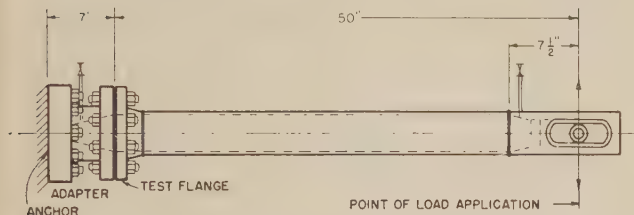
DIAGRAM OF TEST ASSEMBLY
